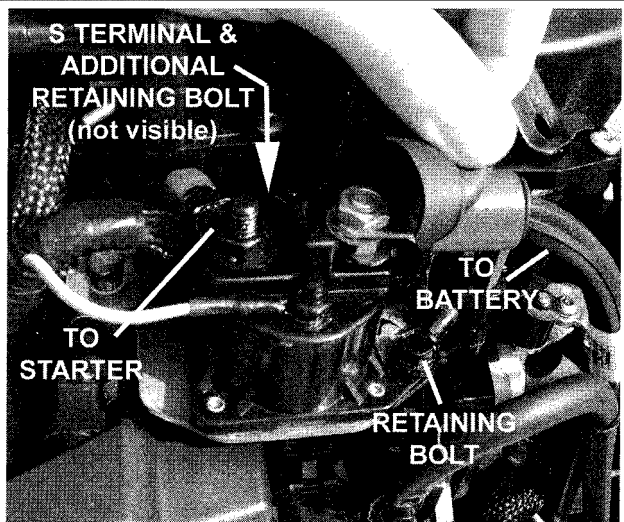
Typical solenoid mounting for FICHT motors-V4 shown
